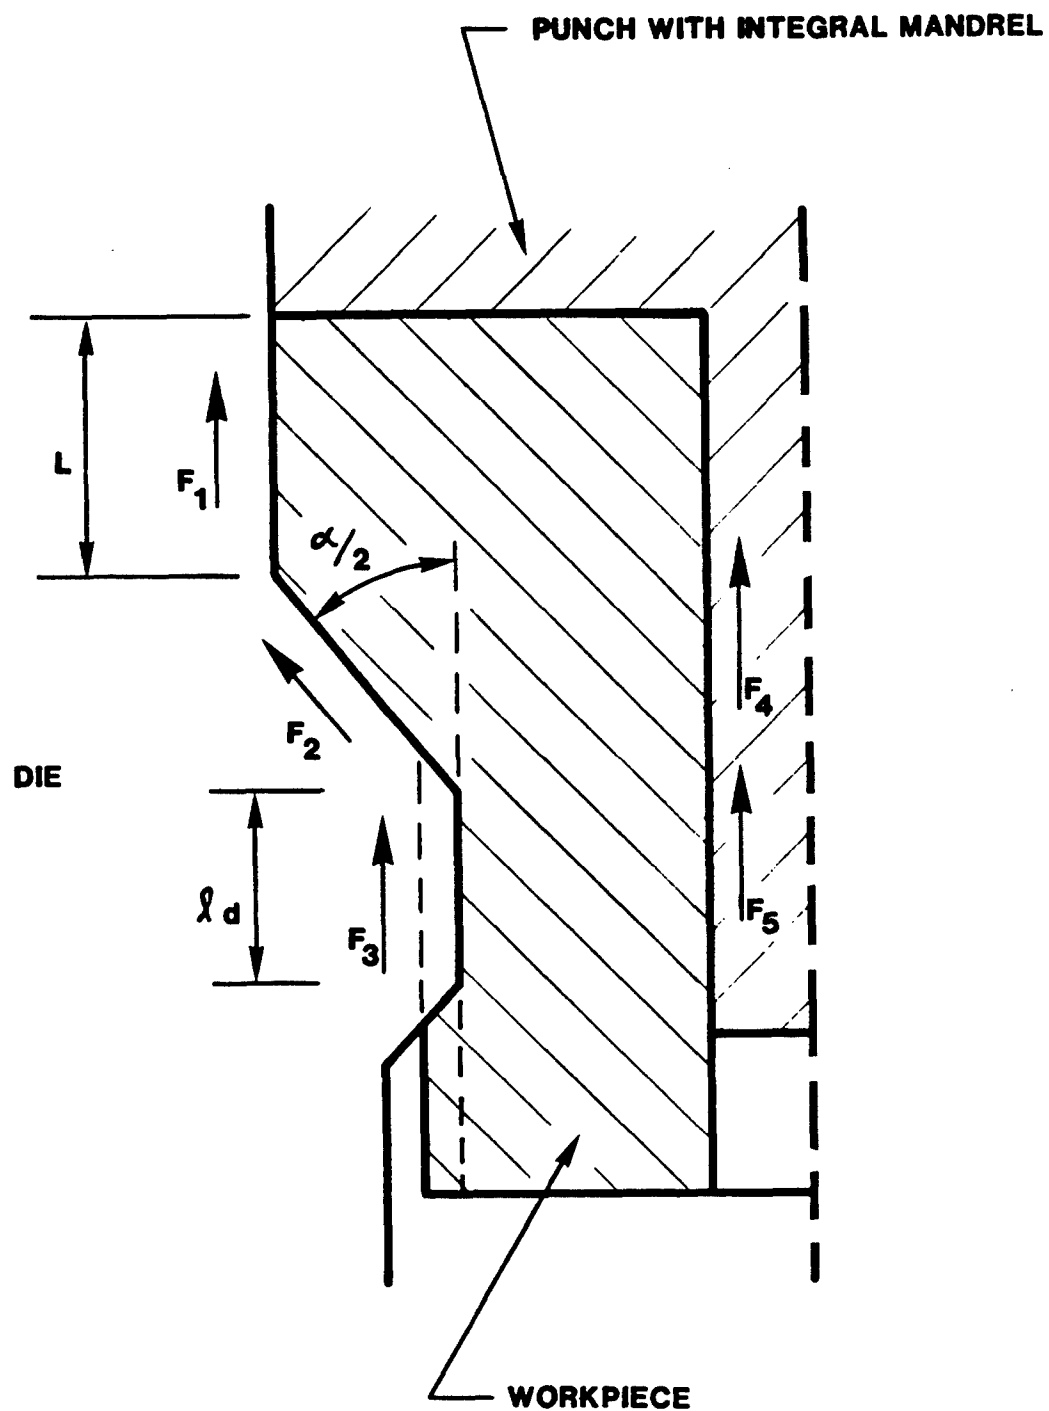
Frictional Forces in the Extrusion of Spur and Helical Gears (symbols explained in text)
